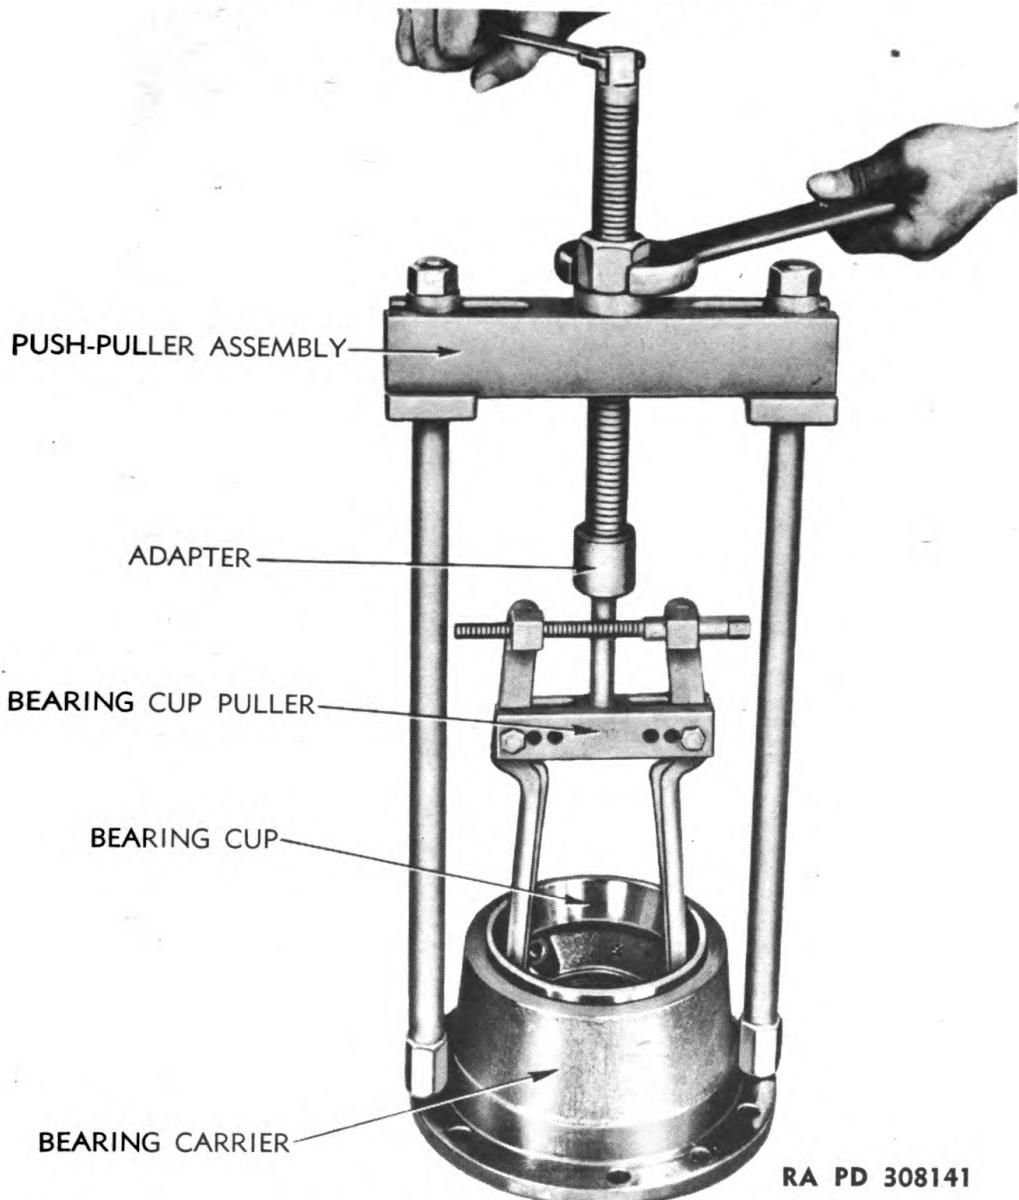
Removing Bearing Cup From Bearing Carrier, Using Puller (41-P-2905-60)
